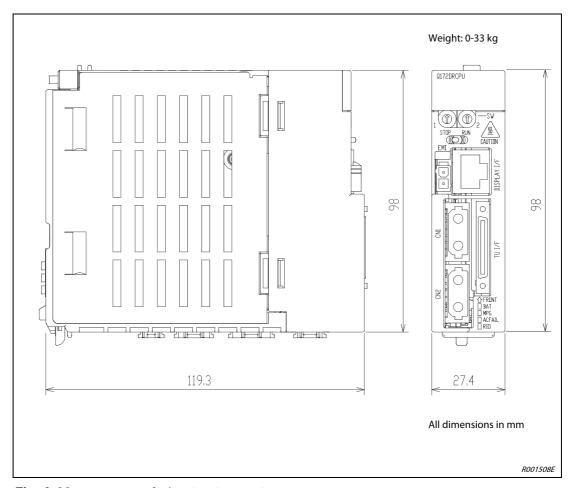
Dimensions of robot CPU Q172DRCPU
